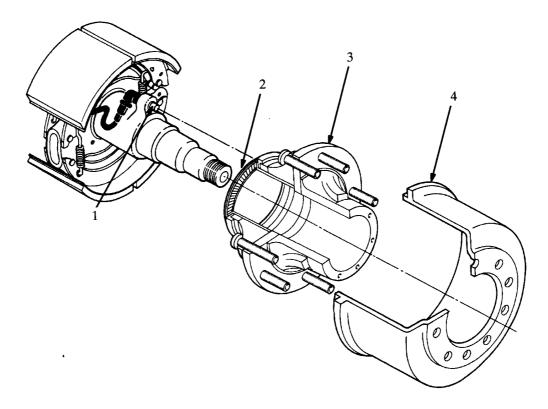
Exciter Ring Installed on Rear Wheel Assembly
